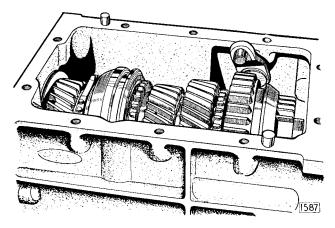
The gearbox top cover removed showing the layout of the mainshaft gears.
